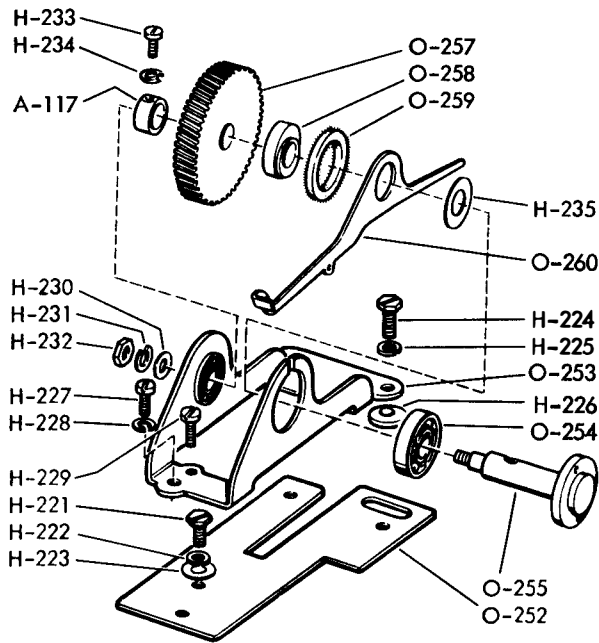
Keyboard and Base, Intermediate Gear Mechanism
